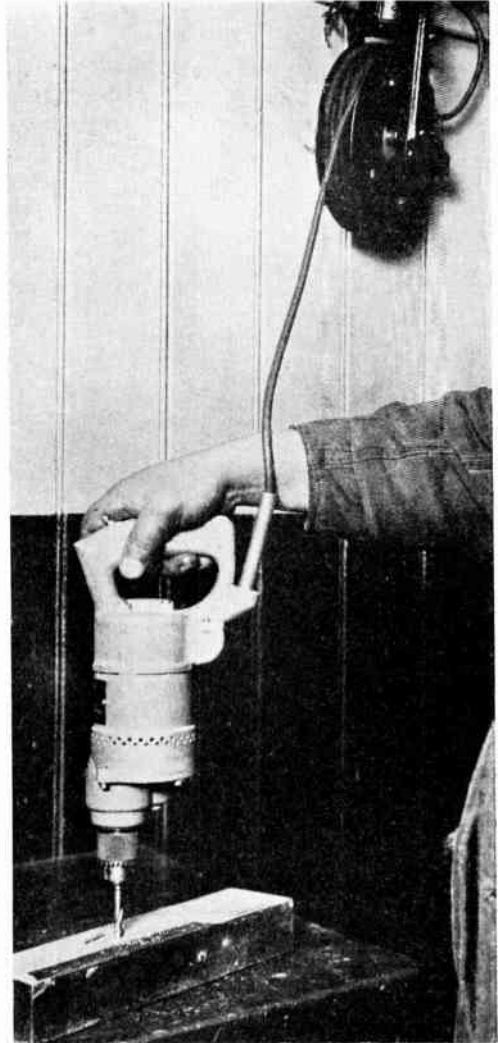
USING A CABLE REEL WITH A DRILLING MACHINE.
